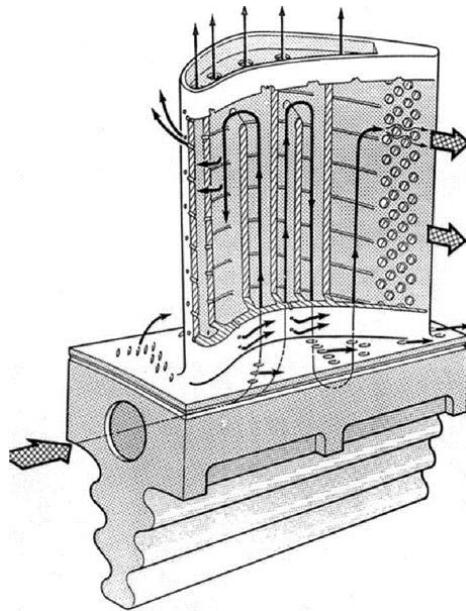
Turbine blade/vane with an inside serpentine shape cooling configuration [32].
